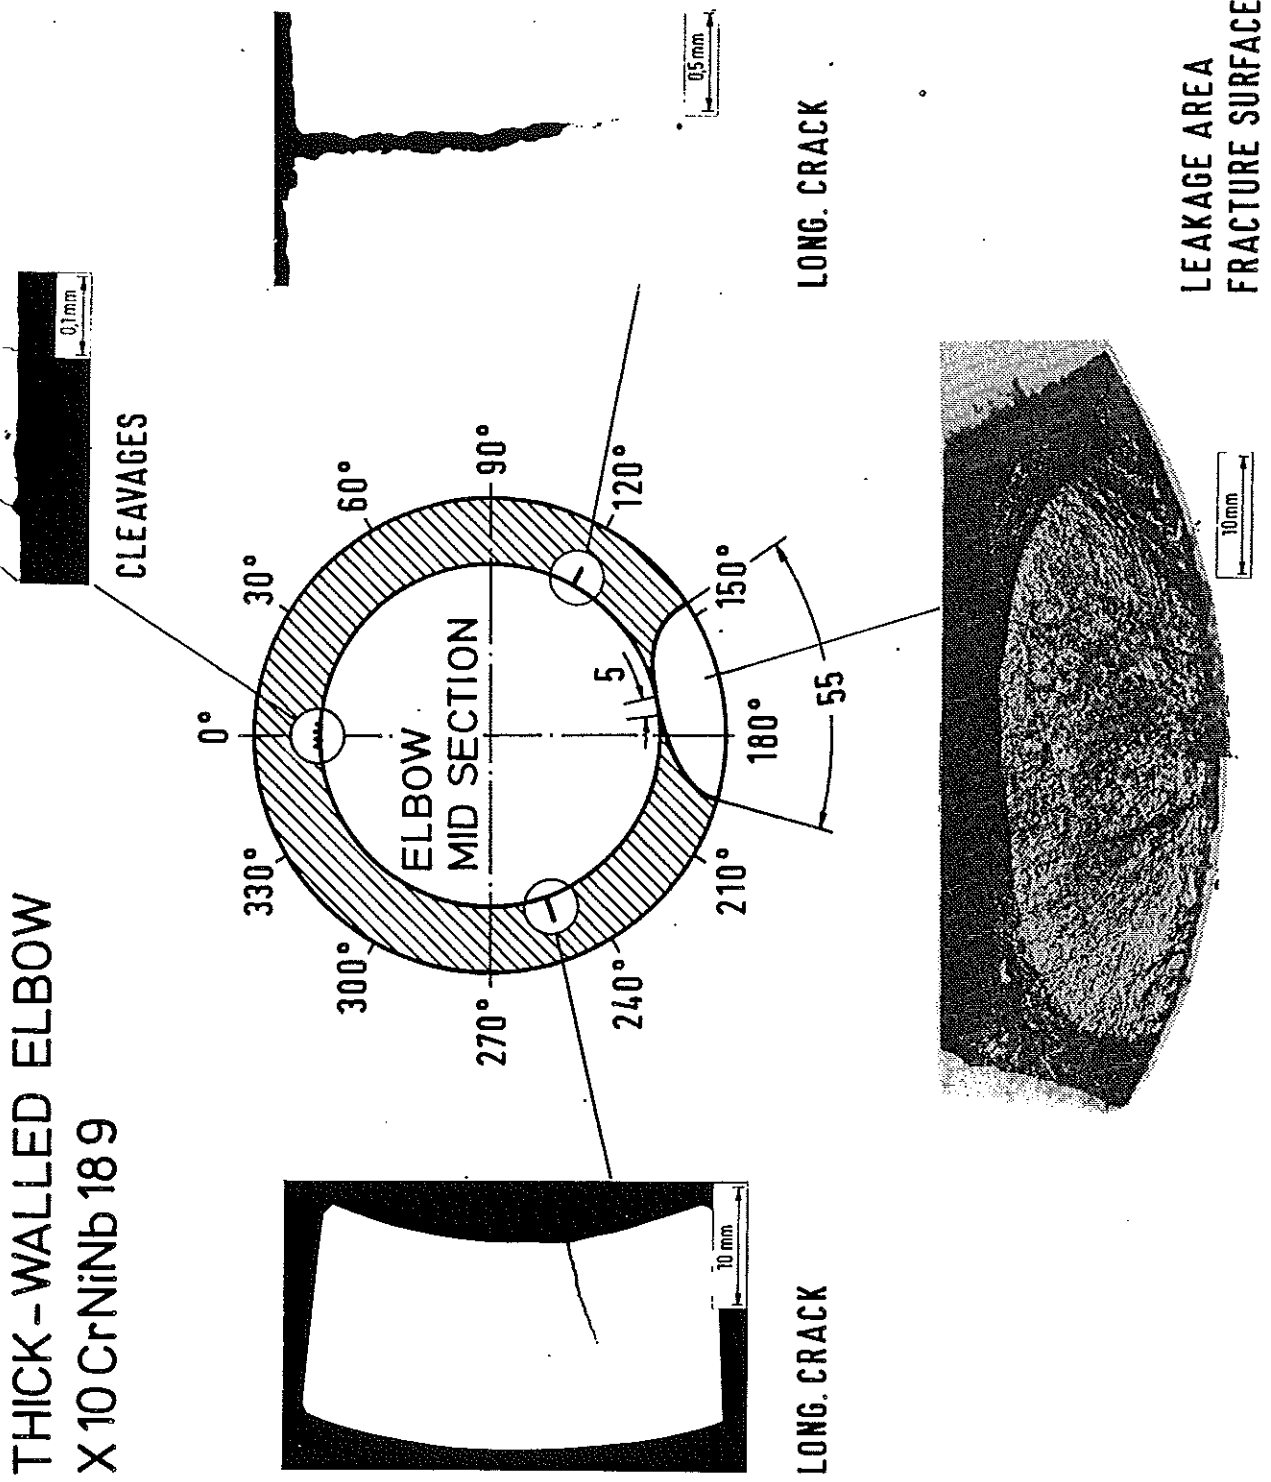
Failure of a thick-walled elbow under cyclic in-plane bending
